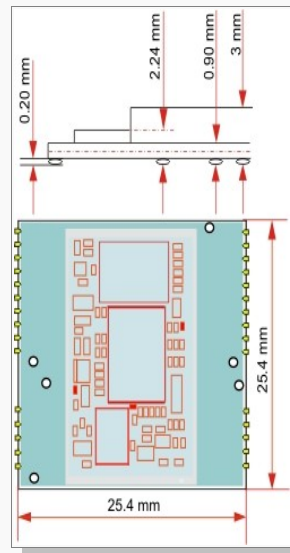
The mechanical draw of the JP13-LP/LPx with edge contacts
